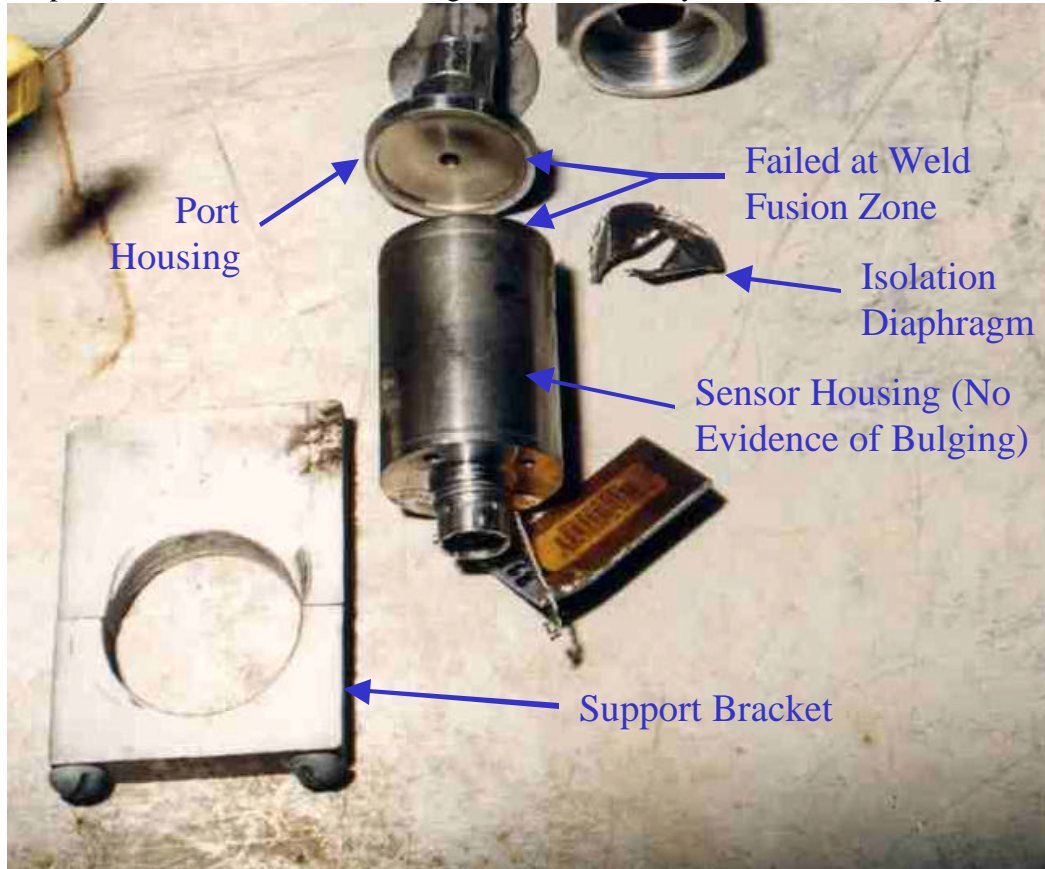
Failed Druck PDCR 130/W/C Pressure Transducer
